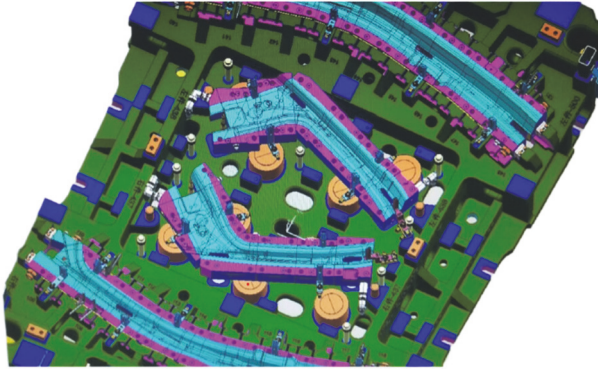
Contact synchronization and consistency of contact pressure for 4 pieces in one mold with in-mold springs
